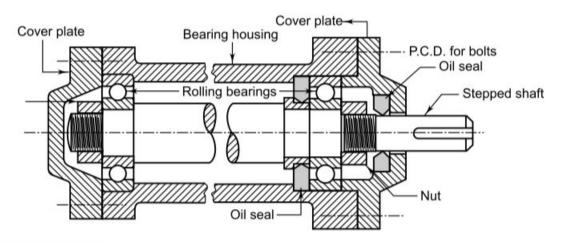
Mounting of Ball Bearings in a Housing with Seals
